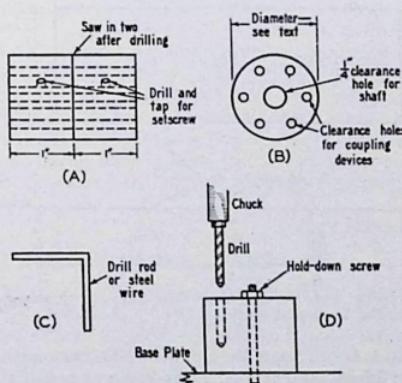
A — The barrel of the shaft coupling before sawing. Drill the holes lengthwise, as shown in A and B, by placing the piece on a mounting base as shown in D, and drilling the holes vertically. Setscrews fasten the barrel onto the condenser and the dial shaft. Steel drill rod or wire is bent accurately to the angle desired as shown in C. All connecting rods must have the same angle for smooth operation of the coupling. A drop of oil should be placed in each hole when assembled.
